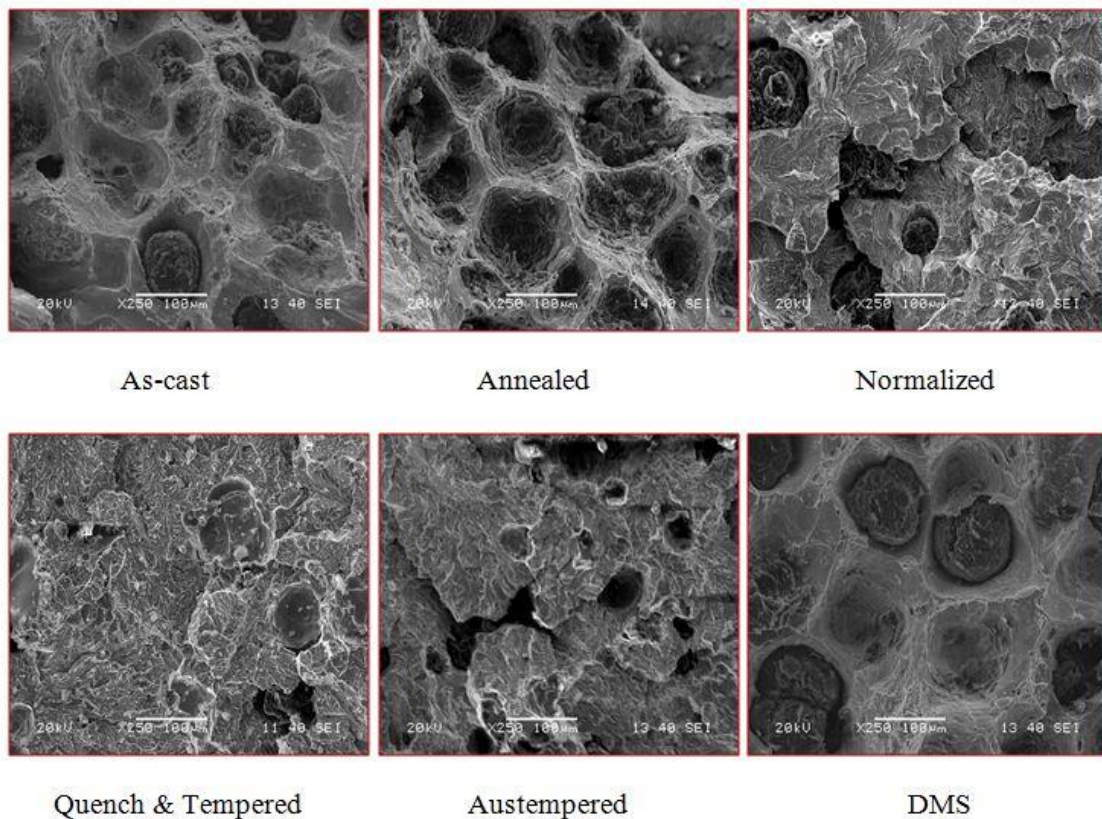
Fracture surfaces of as-cast and heat treated specimens after tensile failure.
